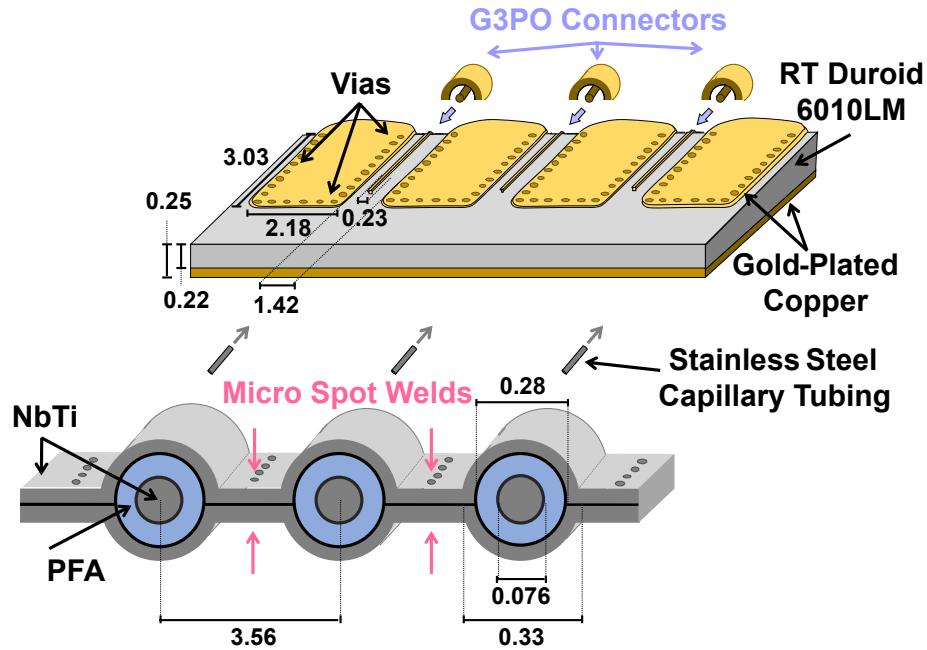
Exploded view of cable-end assembly diagram with key dimensions shown in mm. Drawing is not to scale. From top/back to bottom/front: G3PO half-shell connectors are soldered to the transition board. Two ground tabs with via borders and an intervening signal trace create a 50Ω grounded coplanar waveguide. The FLAX cable center conductors are crimped into stainless steel capillary tubing and soldered to the center traces. The FLAX ground shield is spot welded to the ground tabs. The cable cross-section shows the PFA (blue) insulated NbTi (grey) wire set in semicylindrical crimps made in the shared Nb₄₇Ti foil ground shield. The two sides of the shield are mechanically and electrically bonded with micro spot welds less than $\lambda/16 \simeq 2$ mm (at 8 GHz) apart which run in-between the traces down the length of the cable.
